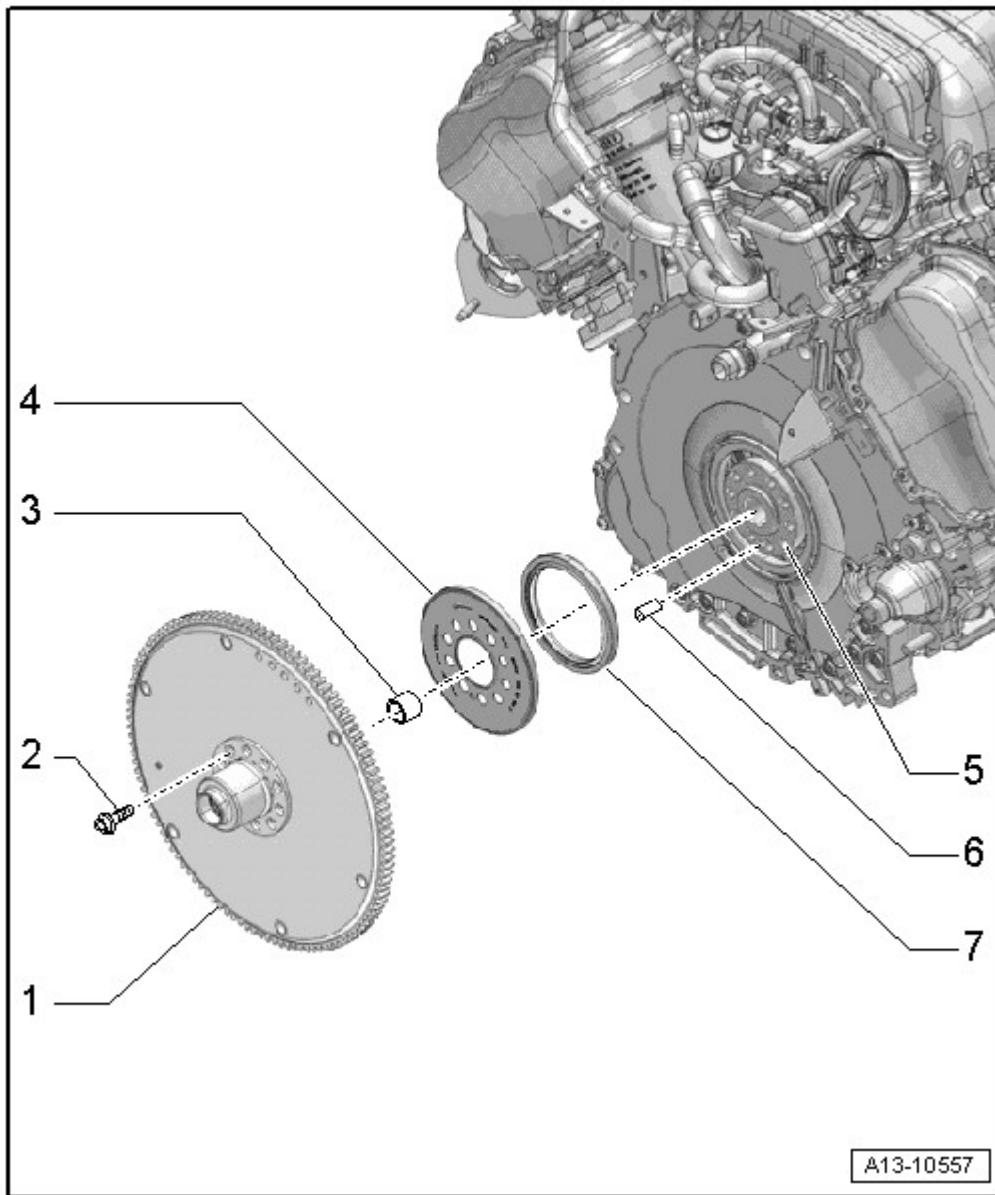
DRIVE PLATE ASSEMBLY OVERVIEW
